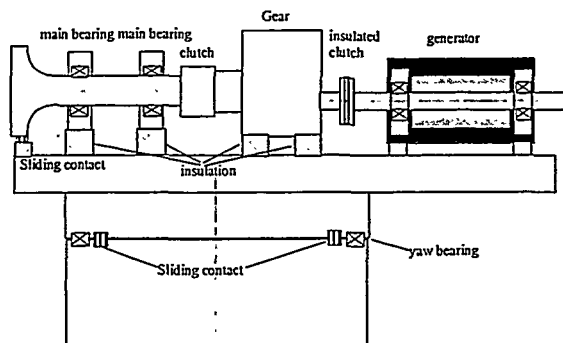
Lightning protection of the main bearings can be made by a sliding contact in front of the bearings, and insulation of the other current paths.
